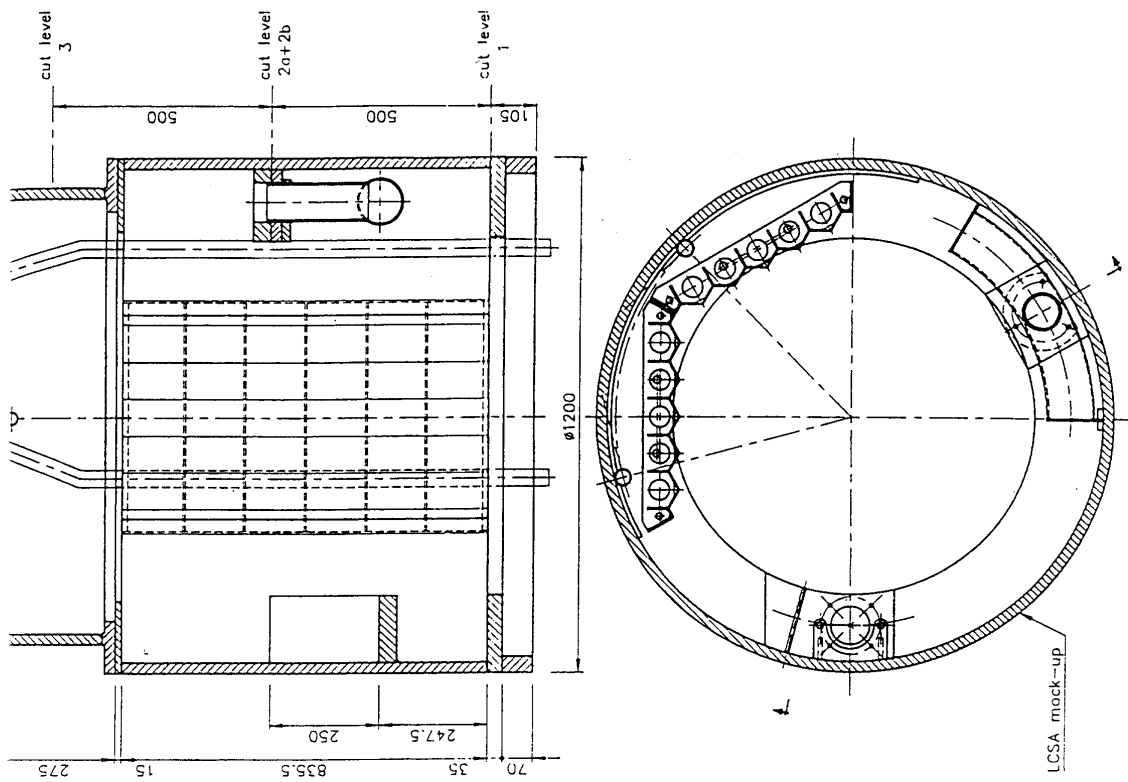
Example of a cutting plan : level III of the lower core support assembly mock-up.
